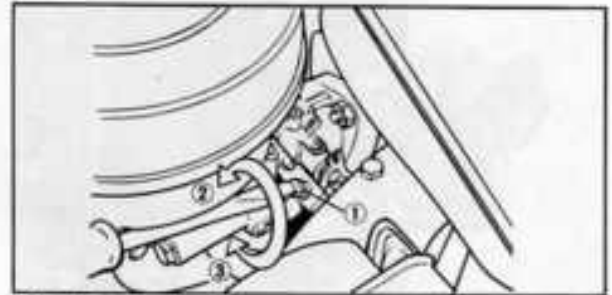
① Throttle stop screw ② Retard ③ Advance
